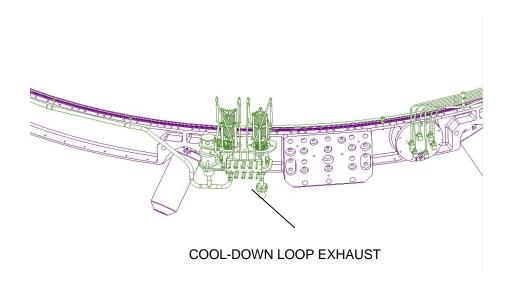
Lower Support Ring Magnet H/W (1 of 6)
